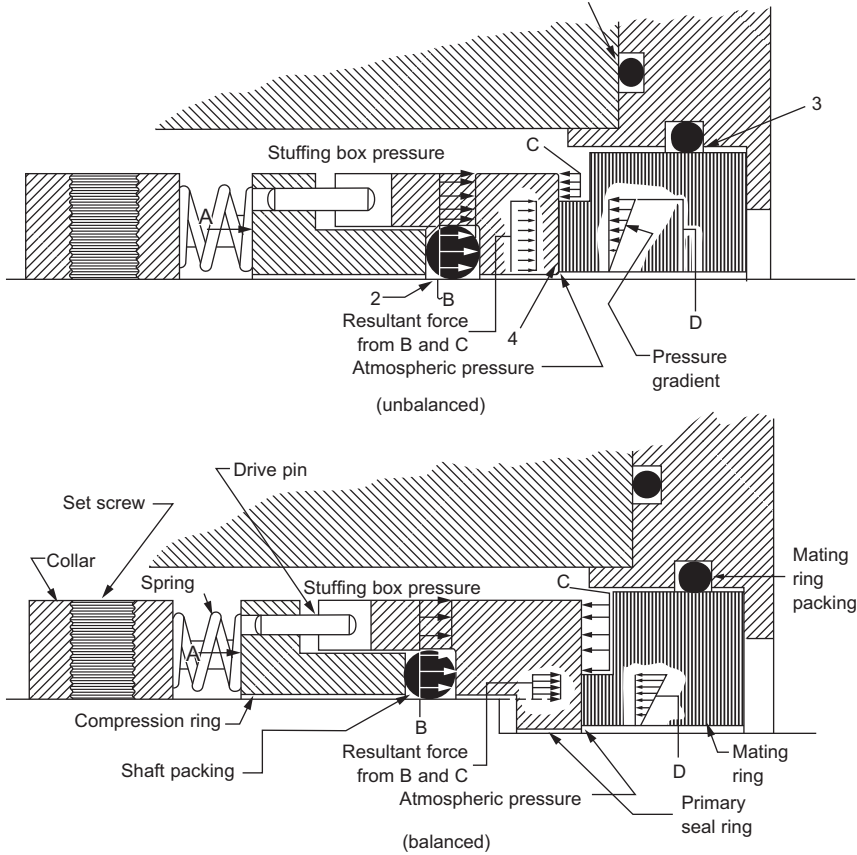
Unbalanced seal and balanced seal with step in shaft.
